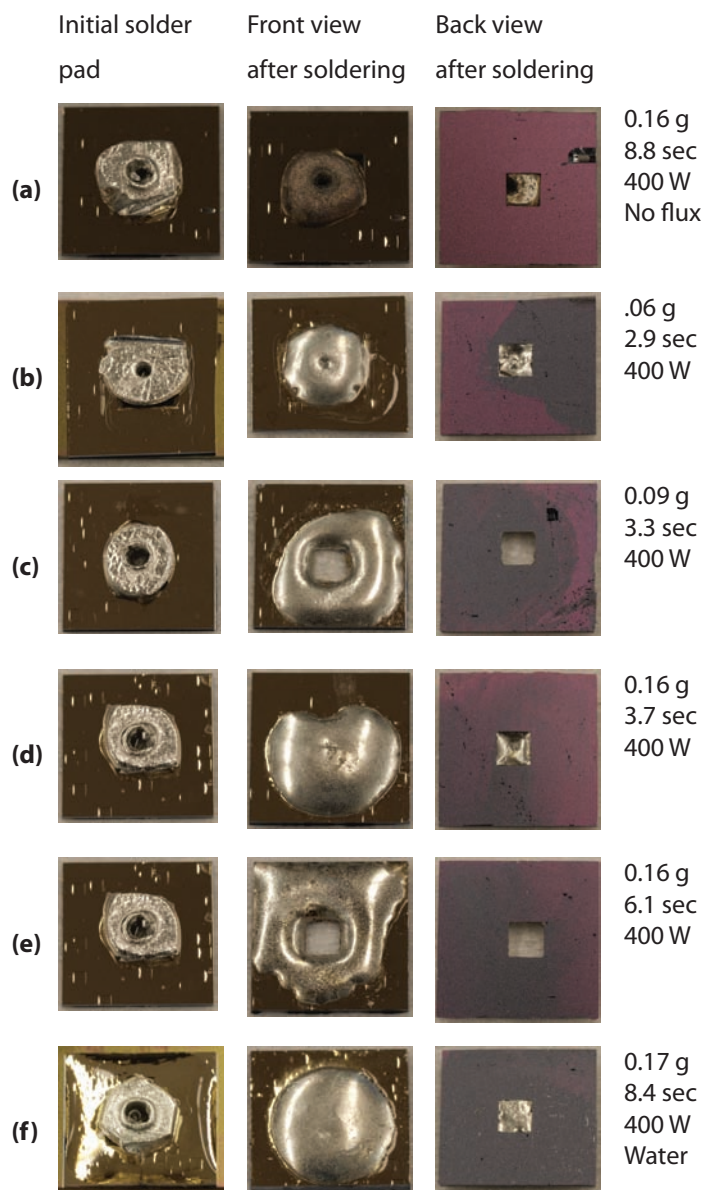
Experimental results demonstrating inductively-heated solder sealing of holes: The key parameters are the initial mass of the solder preform and the induction heating time. (a) Soldering without flux is unsuccessful; (b-c) Low solder mass can be unstable; (d-e) Larger (optimum) solder mass ensures good sealing in a wider time window; (f) Soldering in water is successful.
